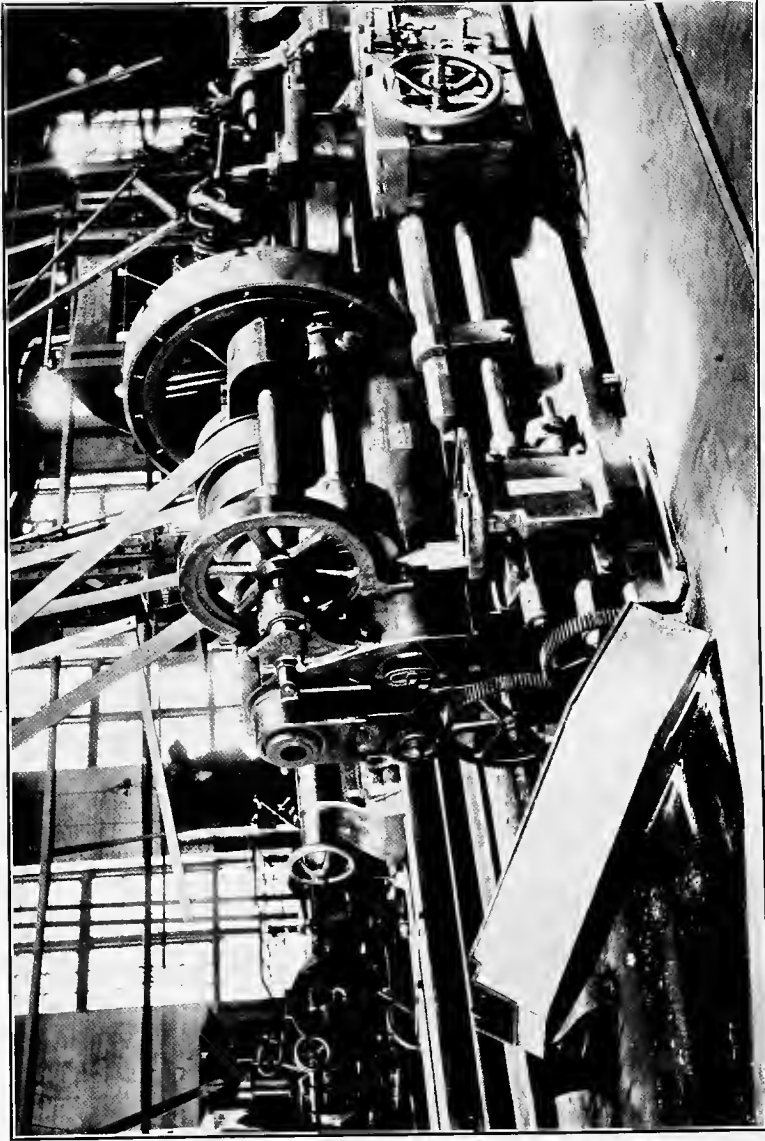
A STEEL GUARD FOR THE END GEARS OF LATHES
